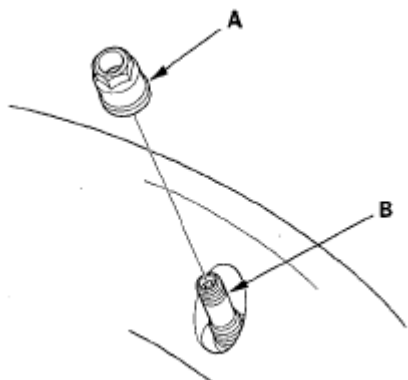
Identifying Valve Stem Nut And Tire Pressure Sensor And Valve Stem
